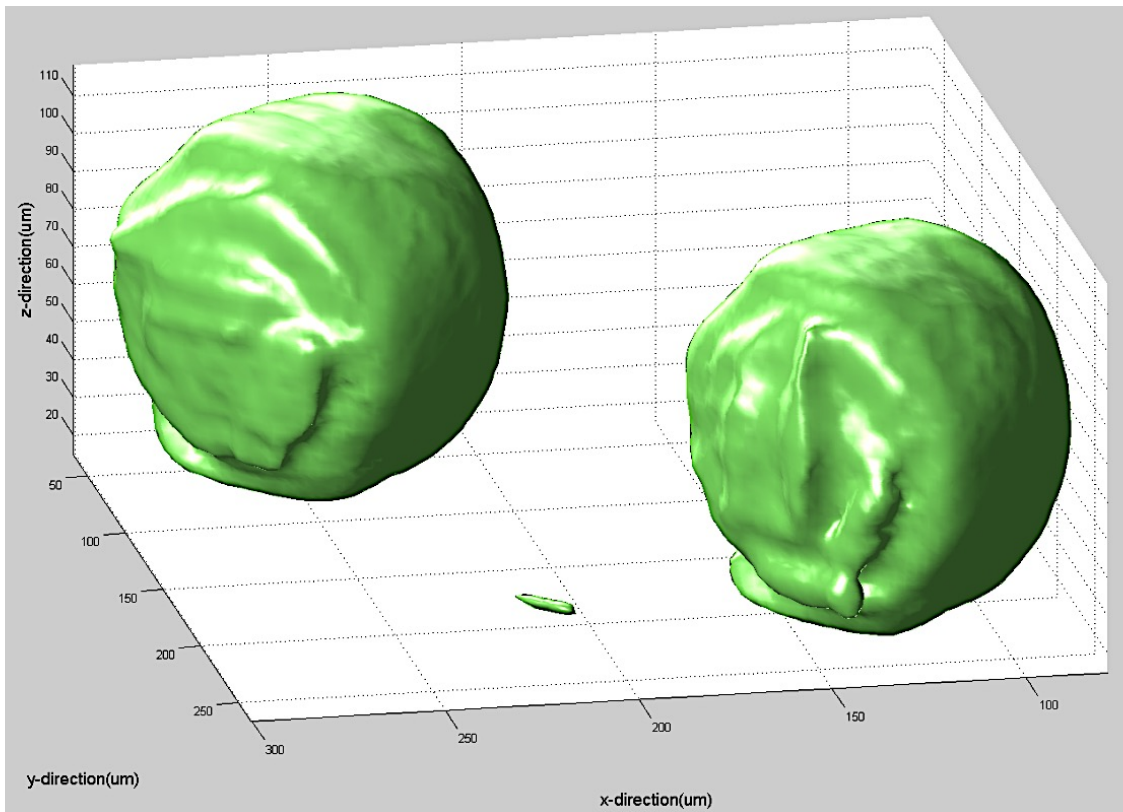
Reconstruction Tiny Solder Bumper on the Silicone Chip
